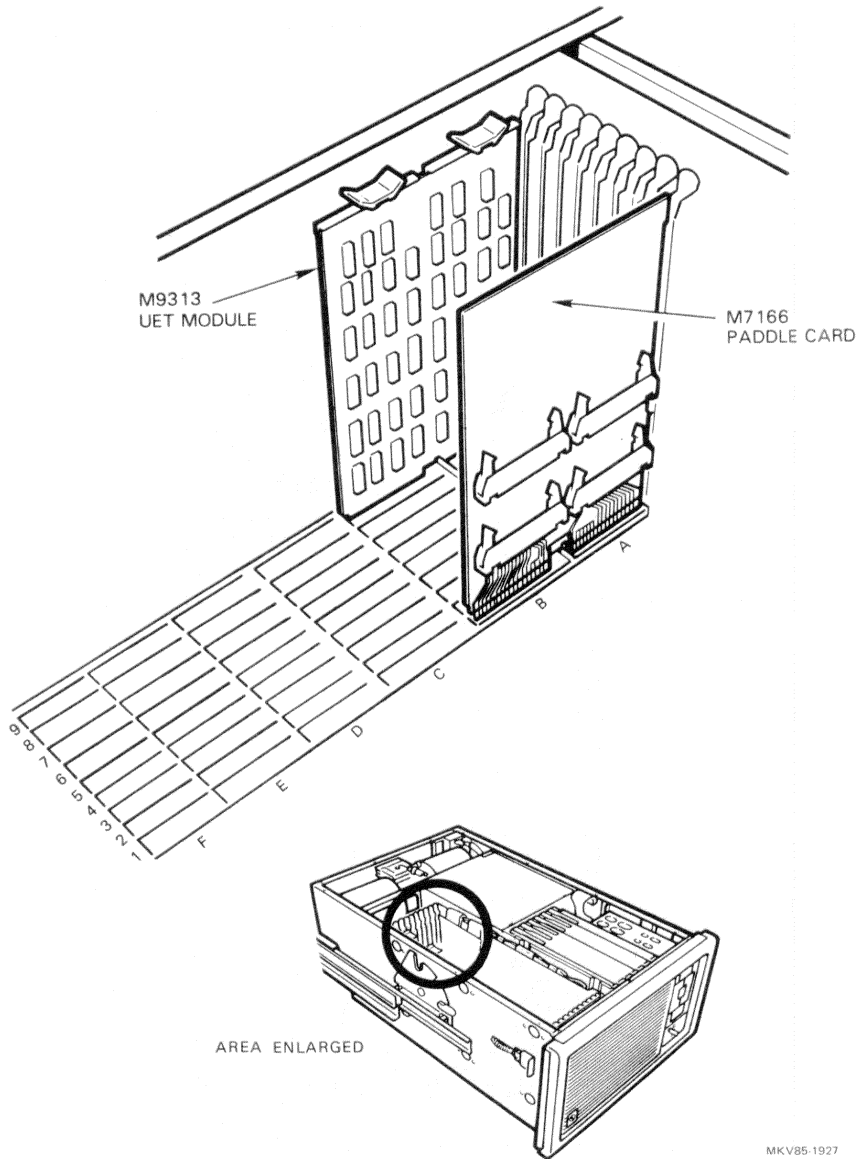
UNIBUS Backplane Showing the M7166 Paddle Card
